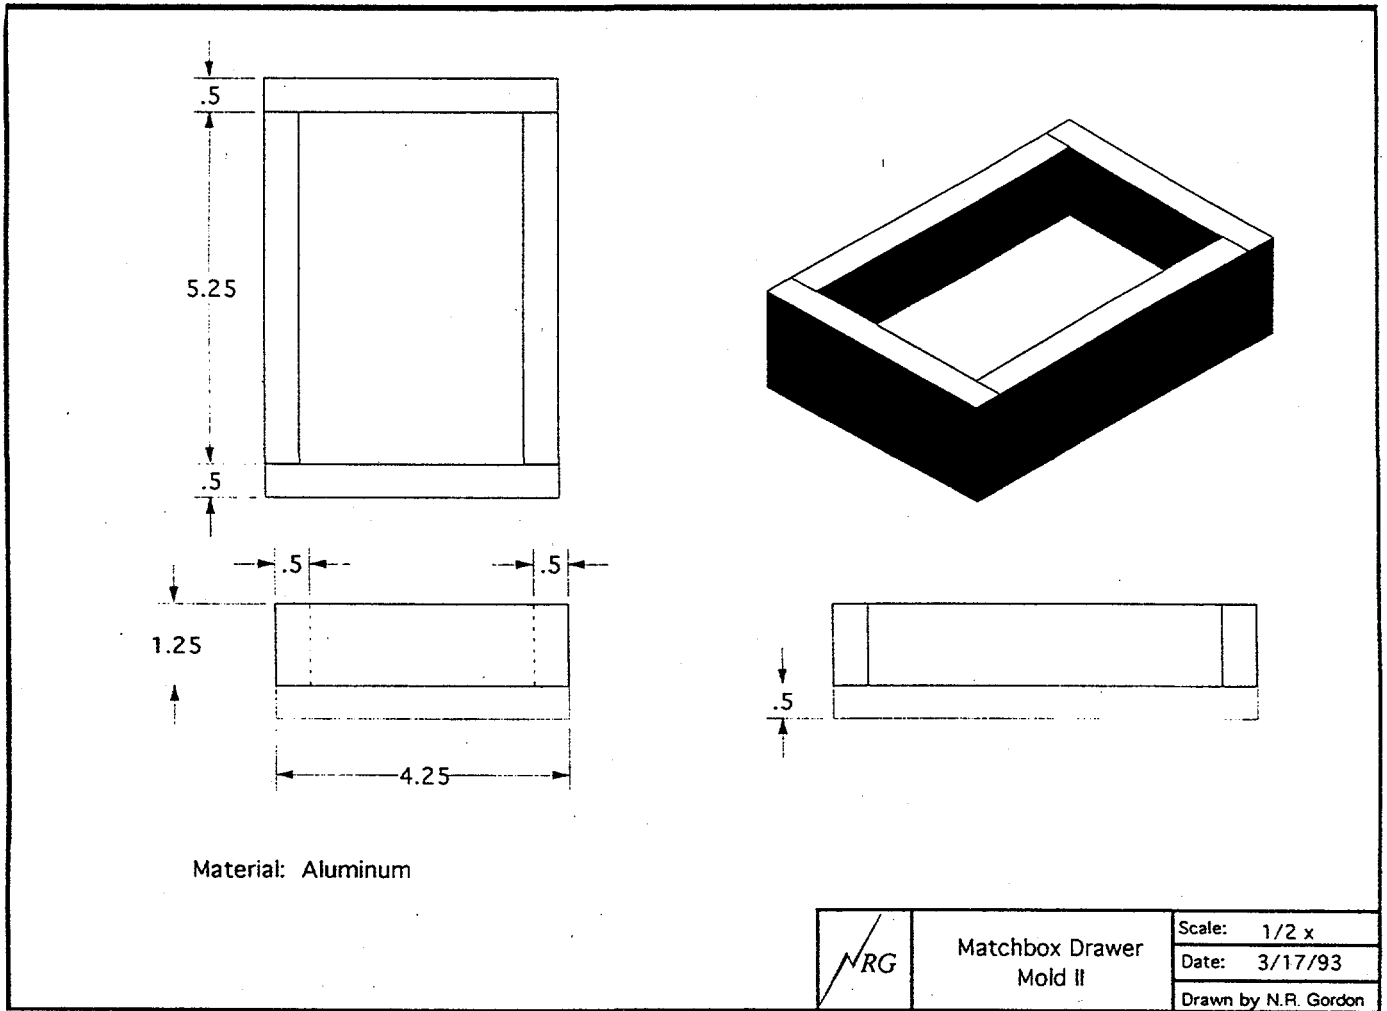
Schematic and Perspective Drawings of Secure Container Drawer Outside Mold
